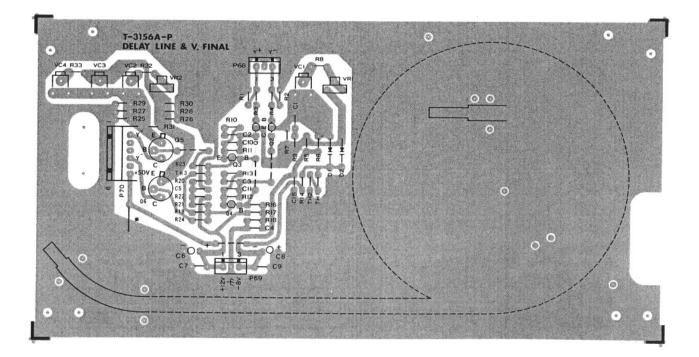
LBO-516 Delay Line and Vertical Final Drive P.C. Board T-3156A
